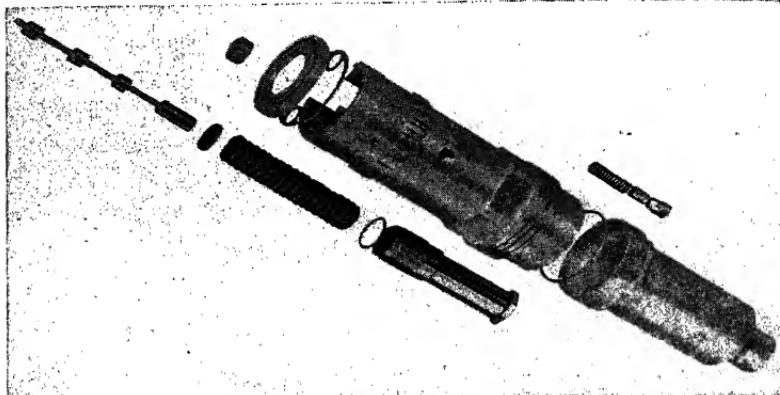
Valve assembly for engines breathing through propeller shaft.
